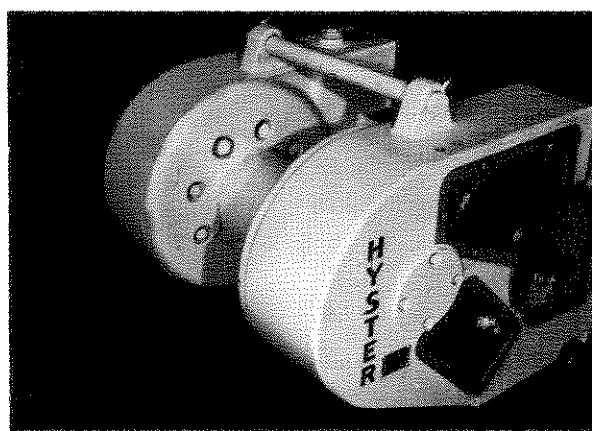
INSTALLATION OF INTERMEDIATE SHAFT AND DRUM GEAR ASSEMBLIES
